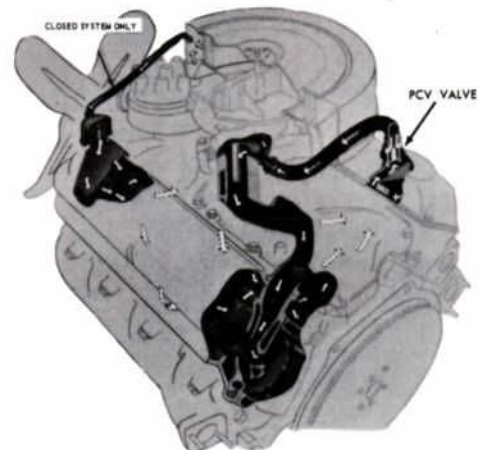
PCV Valve Location—Most 8-Cylinder Engines
